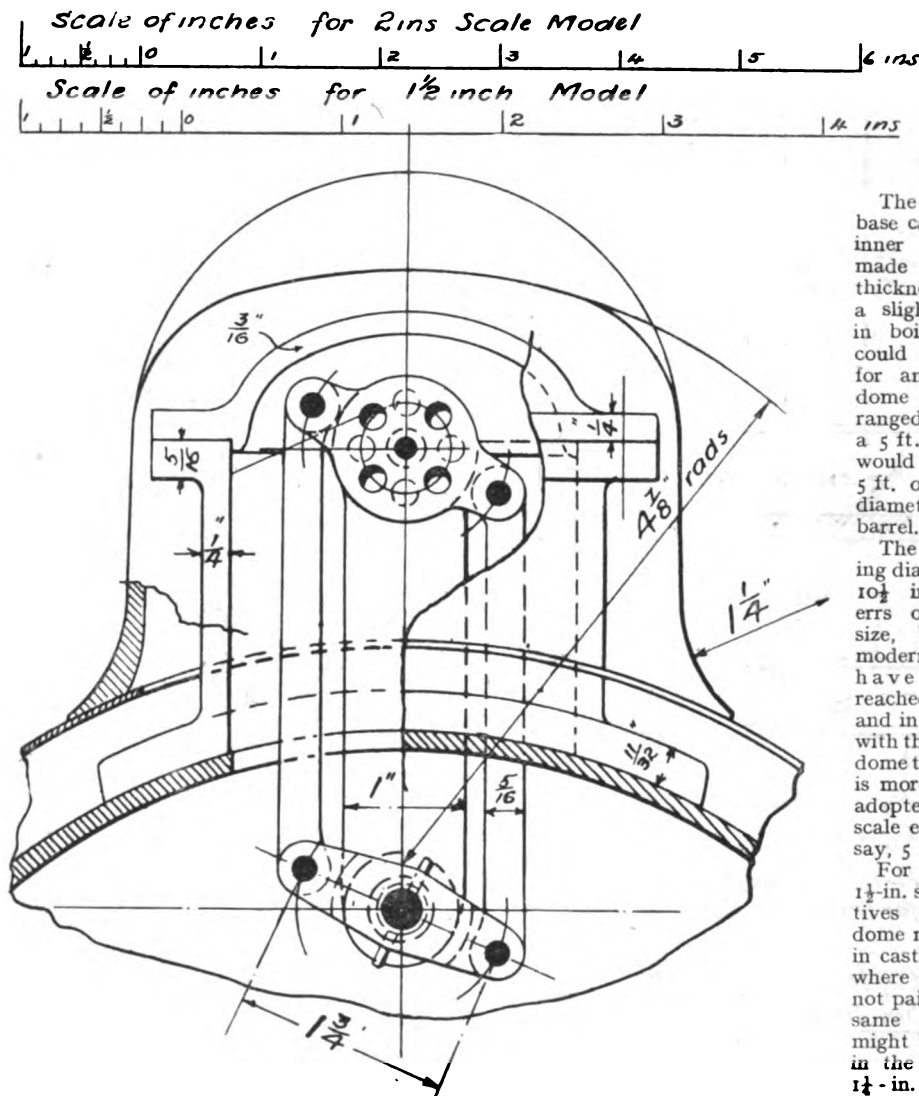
END VIEW OF DOME, SHOWING REGULATOR LEVERS AND PORTS IN VALVE.
